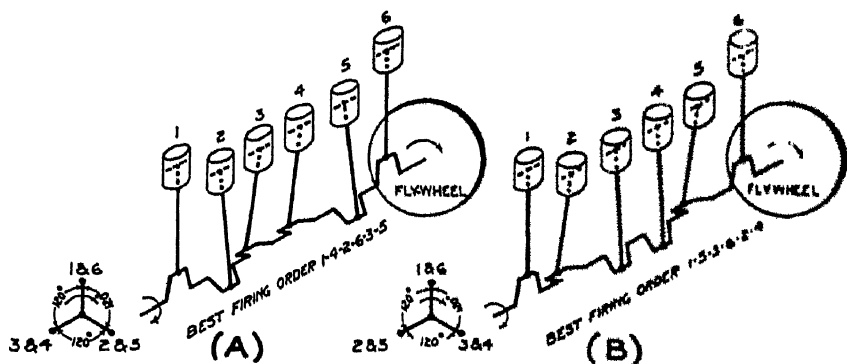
Types of six-cylinder crankshafts. (A) Left type crank firing 1-4-2-6-3-5. (B) Right type crank firing 1-5-3-6-2-4.
